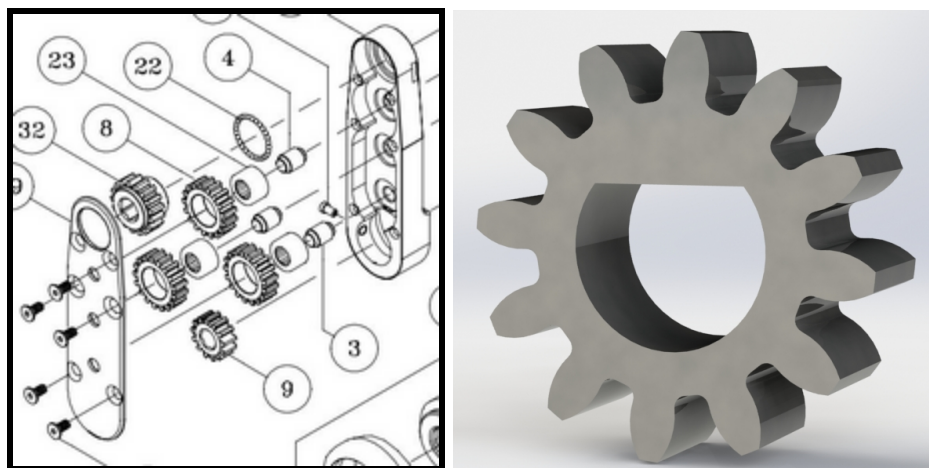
Small gear<sup>4</sup> and Eddie bolt tool design.
